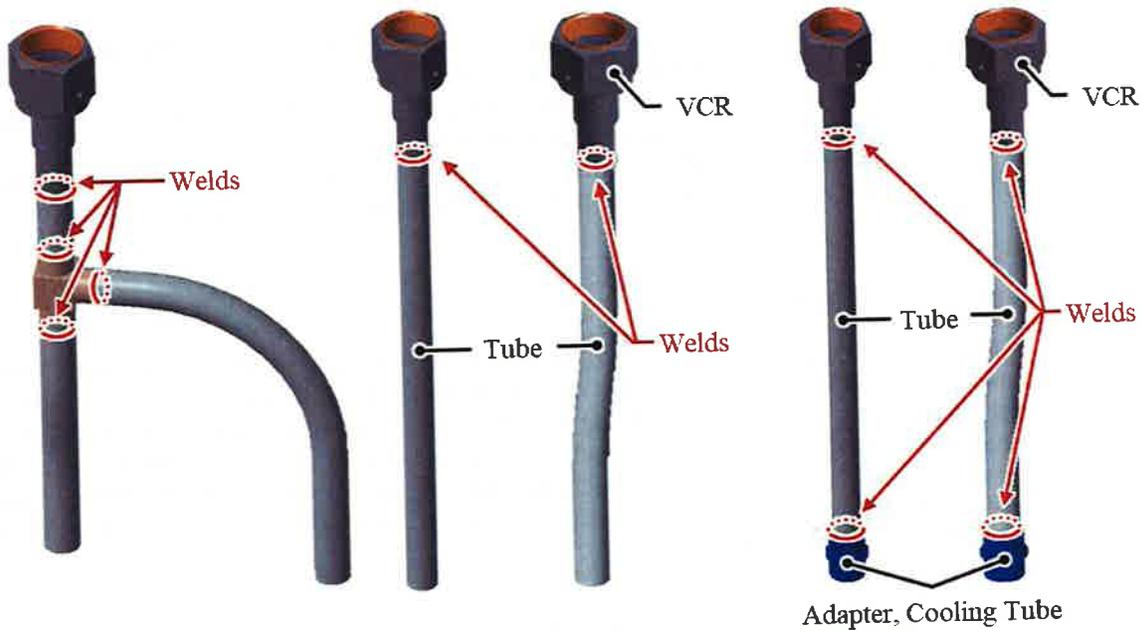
Welds to leak and pressure test on the HTP (Left and Center) & HTT (Right) Stud Weldments
